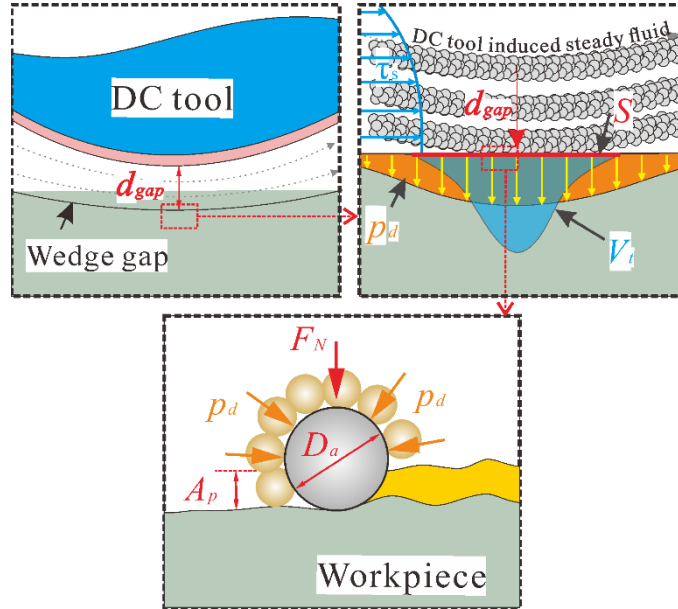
Schematic sketch of material removal during non-contact polishing using DC tool.
